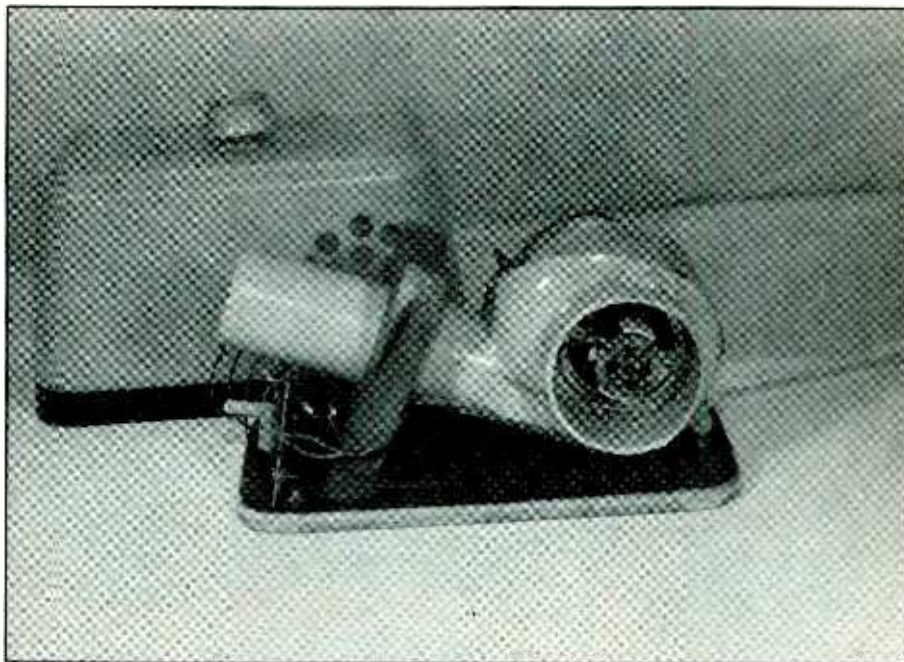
Mounting details for blow dryer's heating-element/fan assembly. Note upward angle of nozzle and controller board mounted below nozzle.
